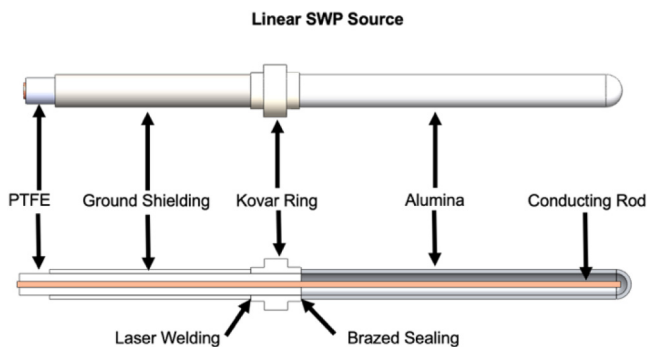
Linear SWP antenna schematics; a hermetic seal is the SWP source in Illinois achieved by laser welding copper with Kovar and brazed sealing of alumina and Kovar.
